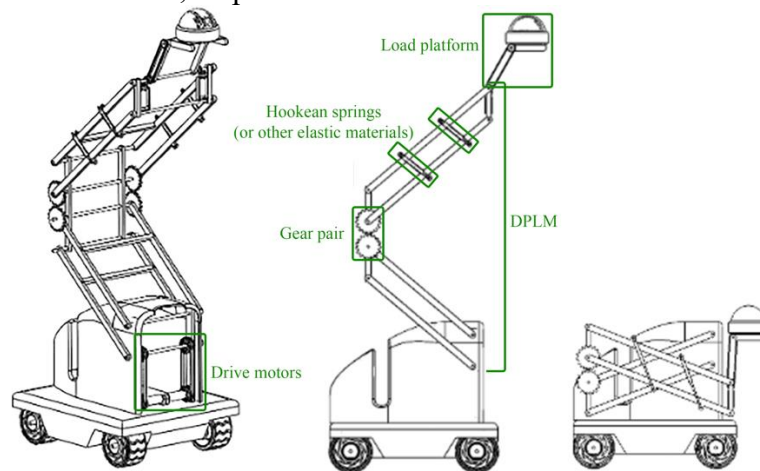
The designed robot with a DPLM as its lifting mechanism.
